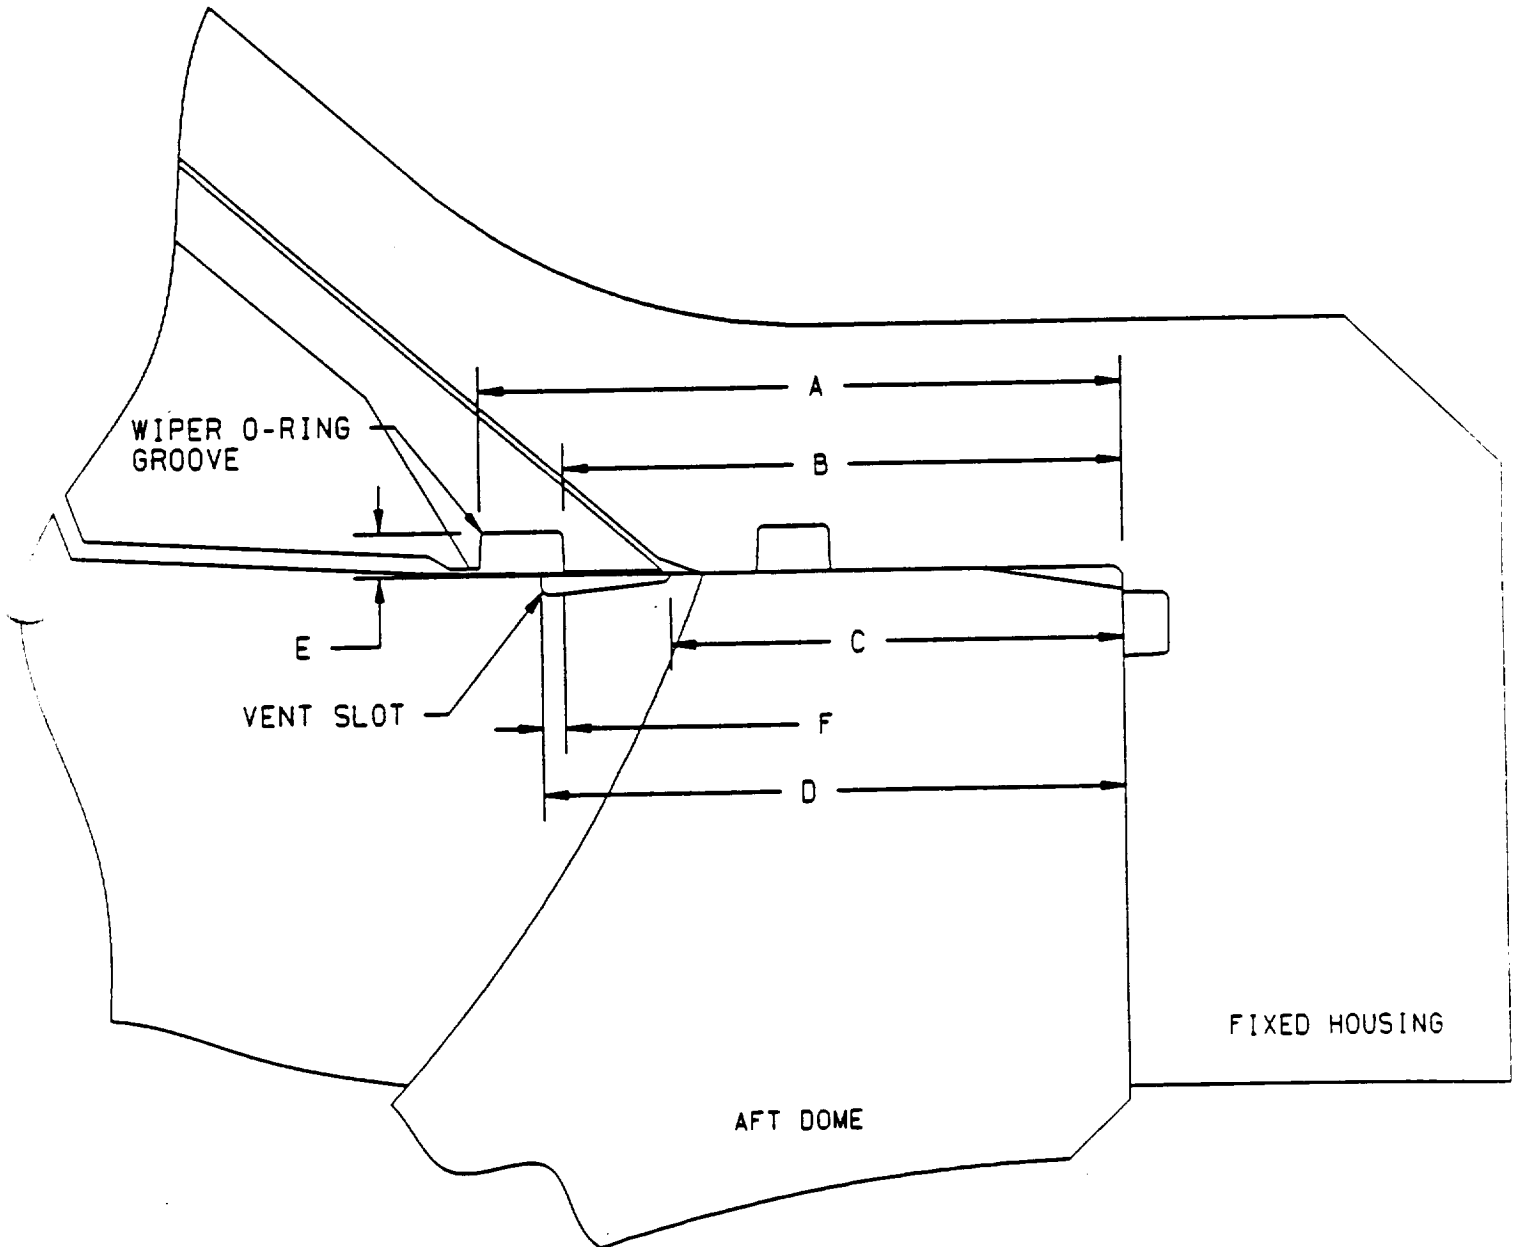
Nozzle-to-Case Joint Wiper O-Ring and Vent Slot Dimensions
